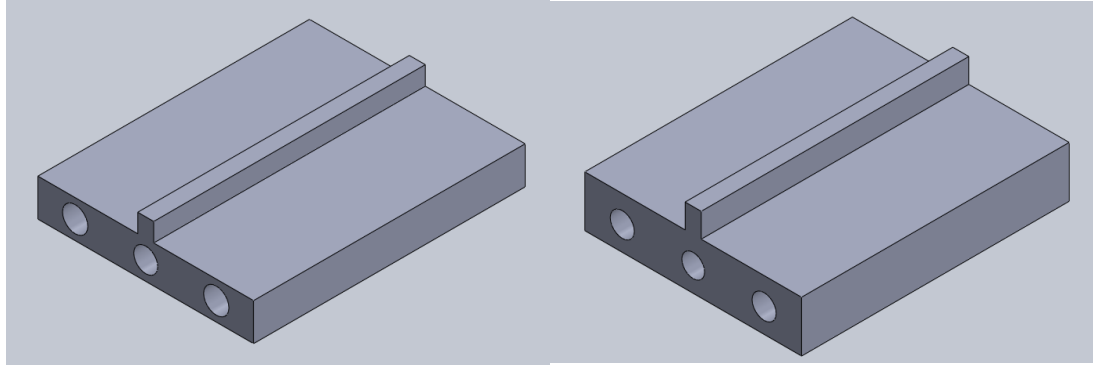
Design drawings of 3D printed small (left) and big (right) plates v1.2
